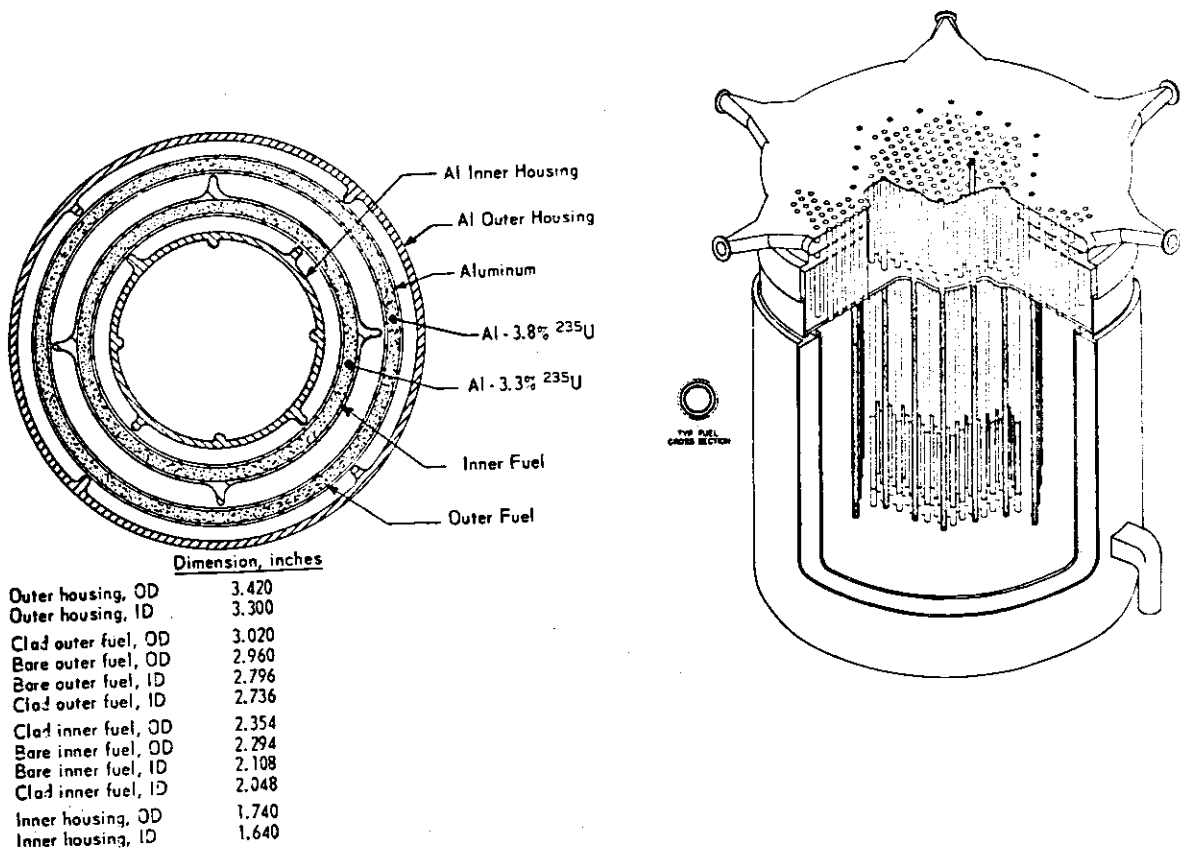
High Flux Demonstration Lattice in a Savannah River Reactor and cross section of fuel assembly.
